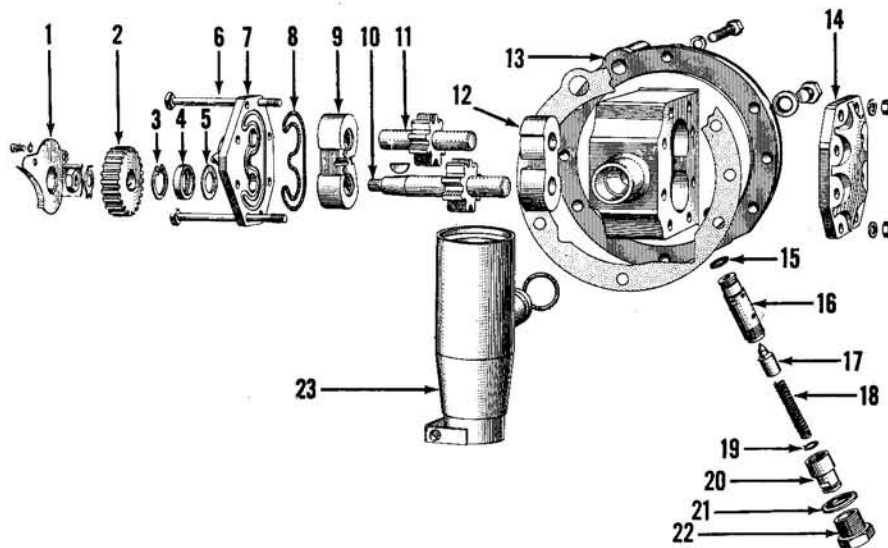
Exploded view of hydraulic pump assembly with intake strainer.
